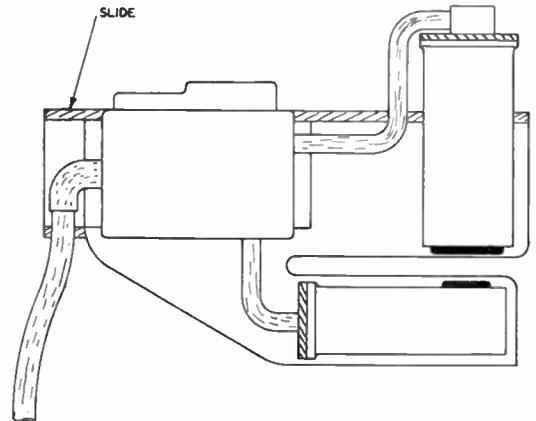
Measuring head of radioactive cold strip thickness gauge.
